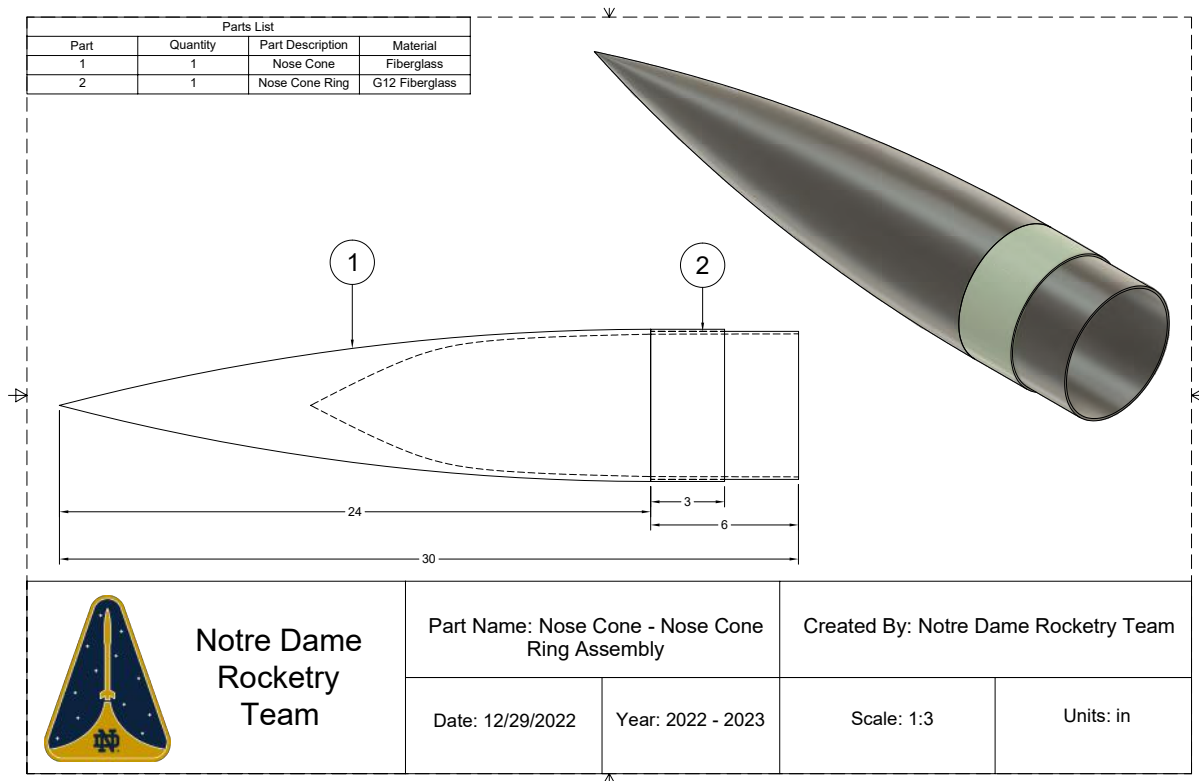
CAD Drawing of Nose Cone/Nose Cone Ring Assembly
